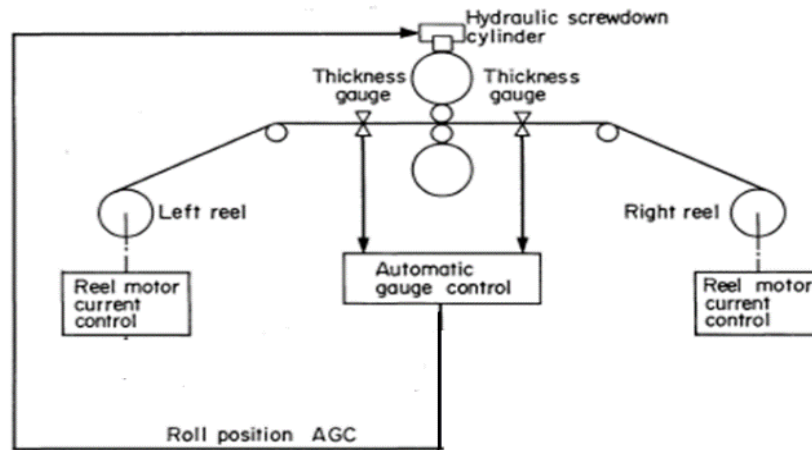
Schematic representation of Single stand 4 HI reversing cold rolling mill
